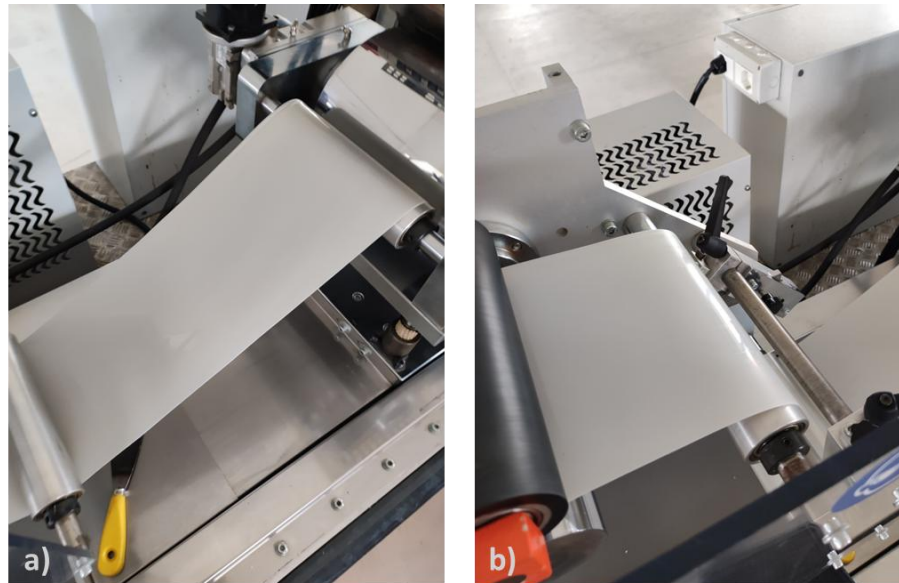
Cast extrusion process: a) Sheet after the calanders; b) Sheet before drawing.
